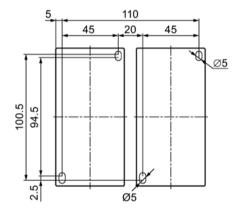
Drillilng plan 3RA233 reversing contactor assembly
